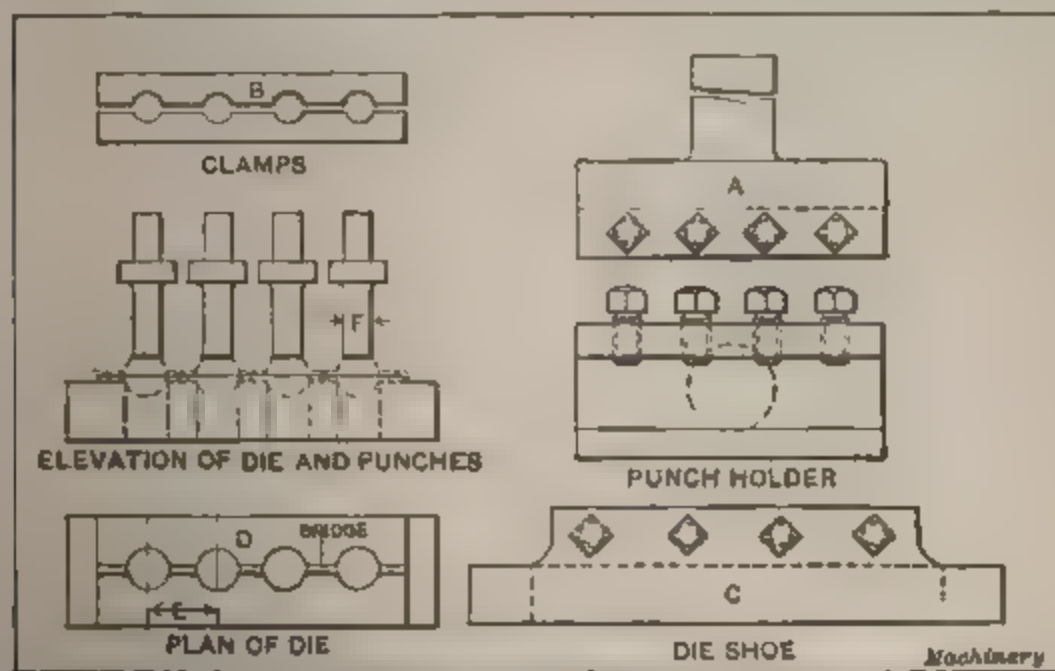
Tools used for Trimming the Balls after Forging in a String
